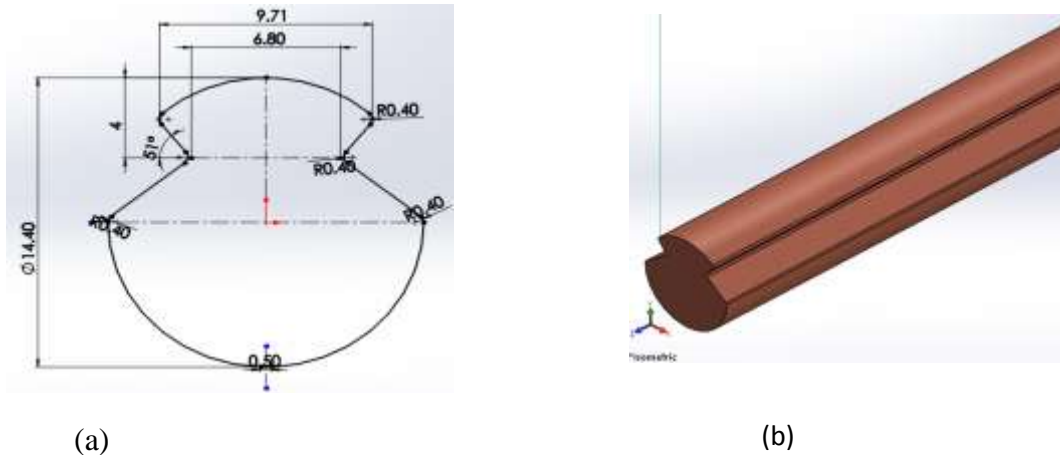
Contact wire design used at AA-LRTs. (a) Sectional dimension of the contact wire; (b) 3D schematics of the contact wire.
